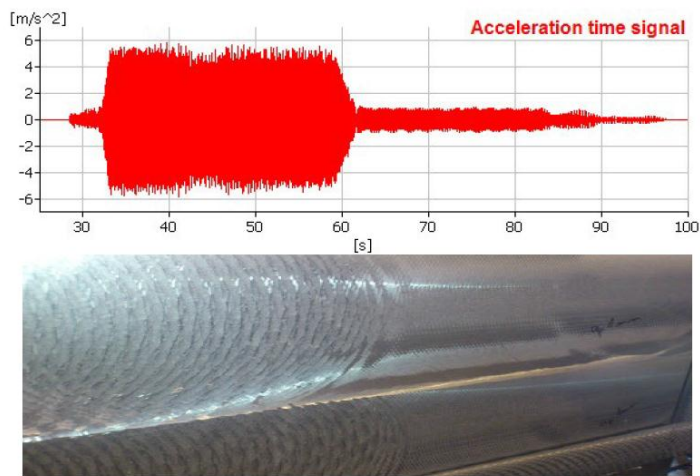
Acceleration and workpiece surface during cutting process. Initially controller is off, then
